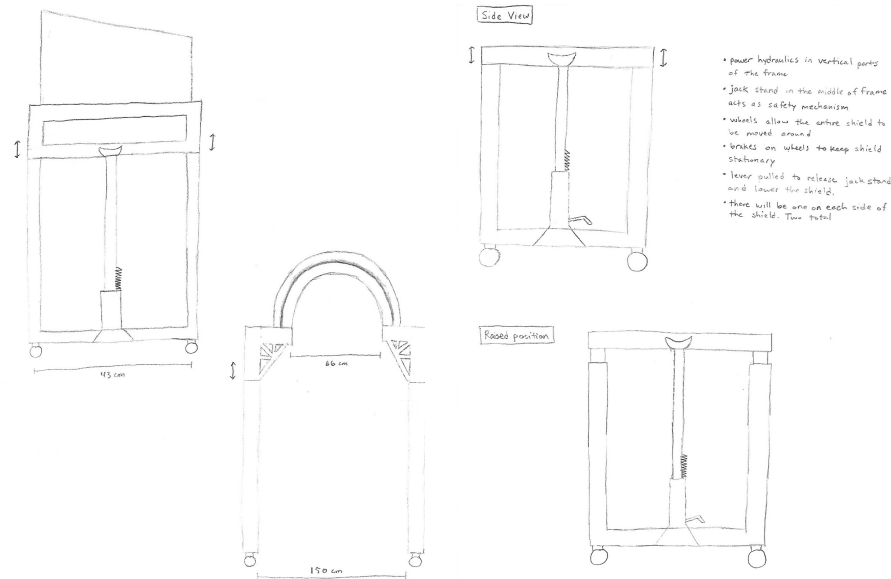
Preliminary sketches of support mechanism. Top left: profile view of entire support system with shield resting on top. Bottom left: frontal view of the entire support system. Top and bottom right: focused profile view of the jack stand safety mechanism in the lowered and raised positions, respectively.
